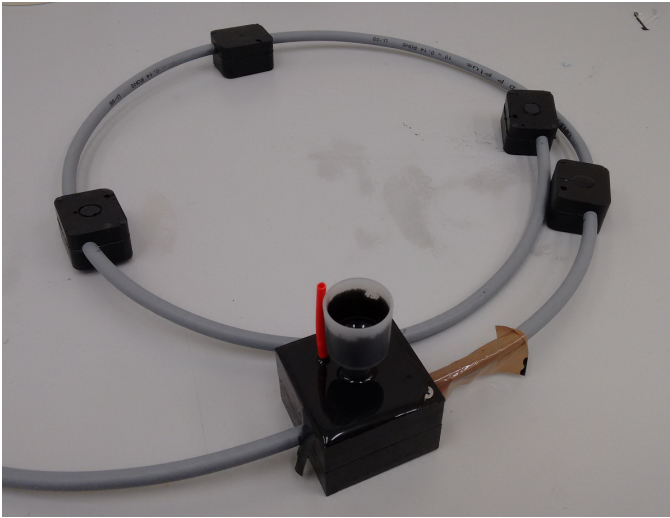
Moulding of distributed magnetometers using polyurethane casting compound
